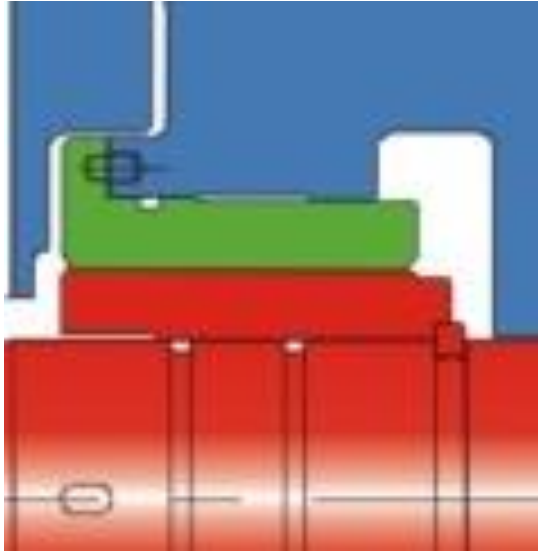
Detail of throttle bushing (green) and sleeve (red) on shaft (Sulzer)
